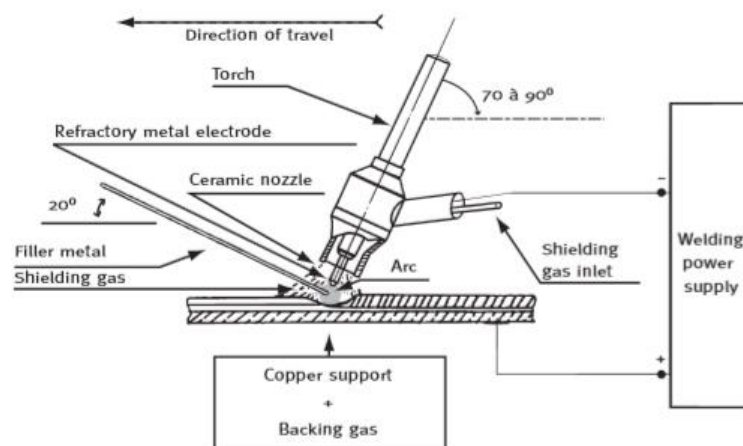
Principle of manual gas tungsten-arc welding
